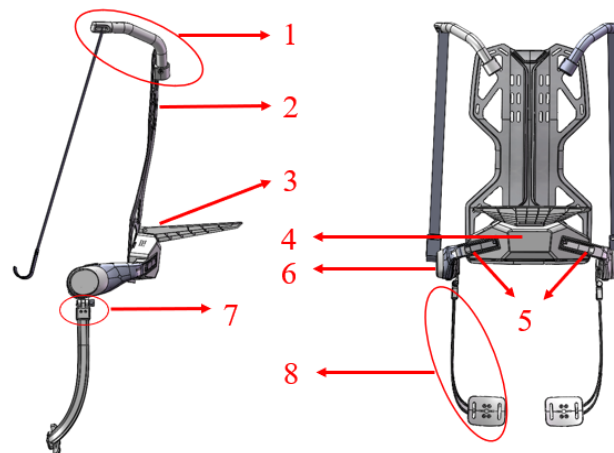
Waist handling exoskeleton. 1 – Arm suspension system, 2 – Body simulation backboard, 3 – Bracket, 4 – Electric control and its battery system, 5 – Hip joint adjustment system, 6 – Motor drive system, 7 – Waist and leg quick change mechanism, 8 – Leg binding components
